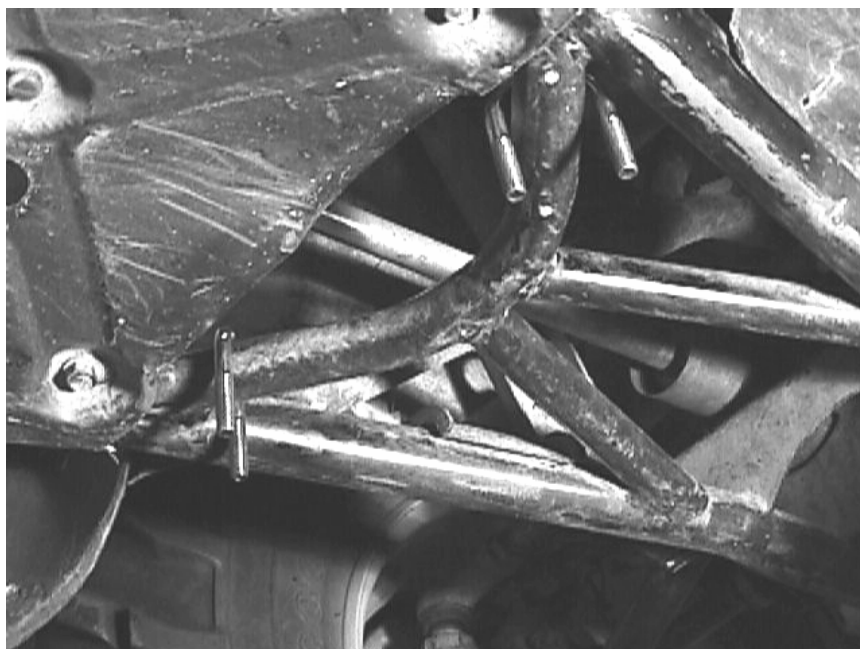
INSTALLING U-BOLTS ONTO FRAME
